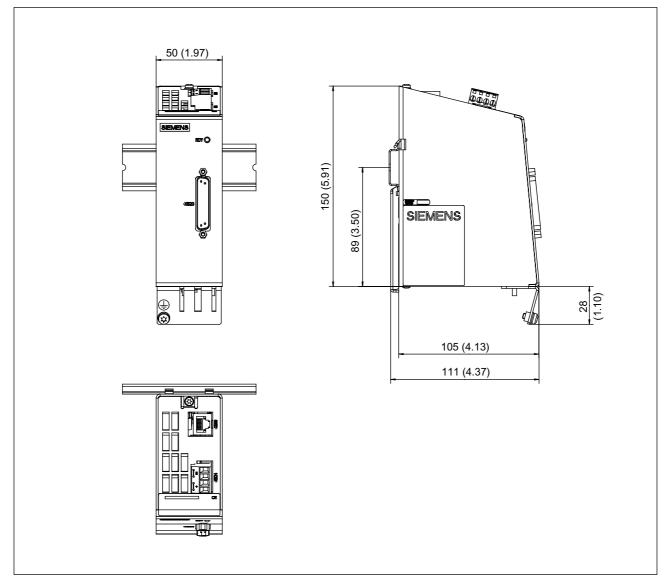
Dimension drawing of the Sensor Module Cabinet SMC10, 50 mm wide, all data in mm and (inches); order number: 6SL3055-0AA00-5AA0
